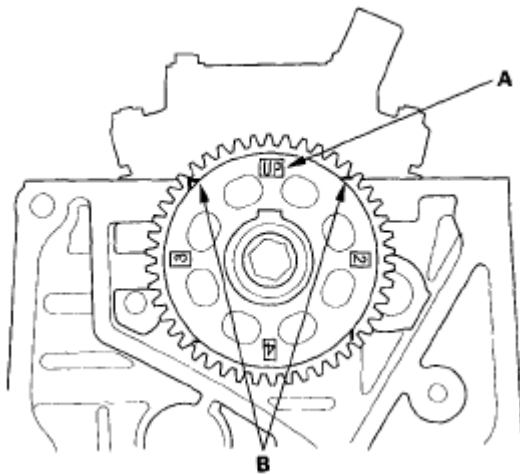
Identifying UP Mark On Camshaft Sprocket
